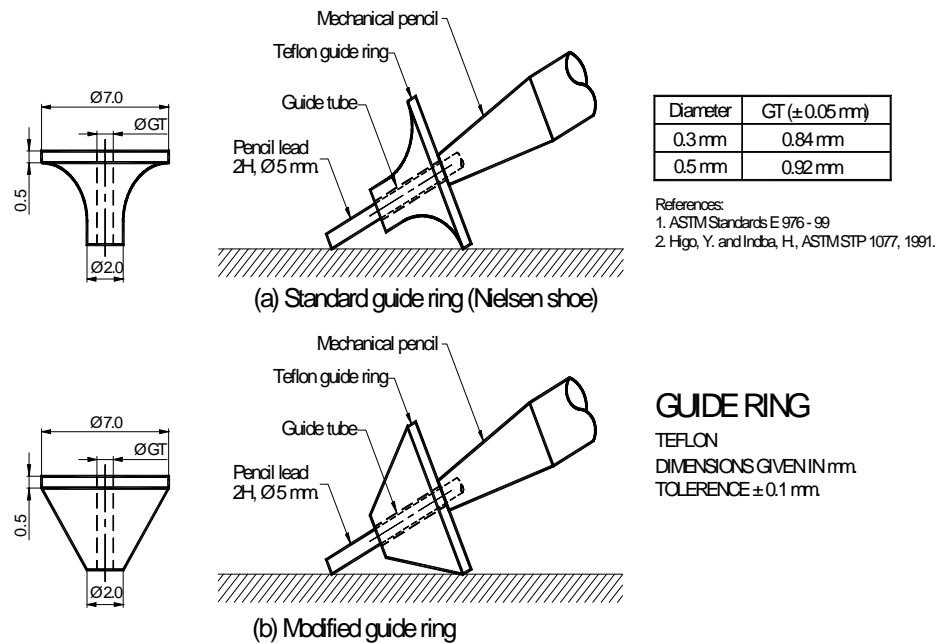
Drawings and dimensions of standard (a) and modified (b) guide rings [120, 121] .
